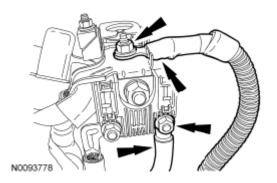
Locating Positive Battery Cable With Nuts Courtesy of FORD MOTOR CO.
